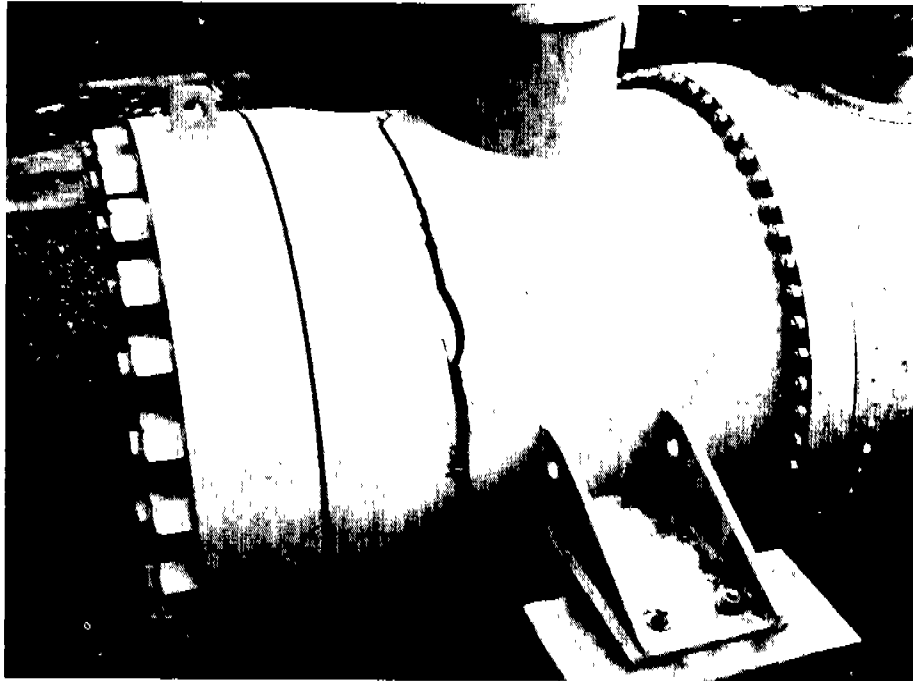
FRACTURE IN HEAT EXCHANGER THAT STARTED AT A DELAYED TOE CRACK
